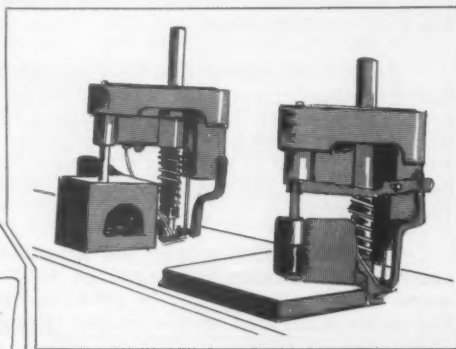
UNITS FOR CUTTING FISH: AT THE RIGHT THE MACHINE FOR CUTTING THE ANAL PORTION; AT THE LEFT, THE MACHINE FOR CUTTING THE HEAD.
